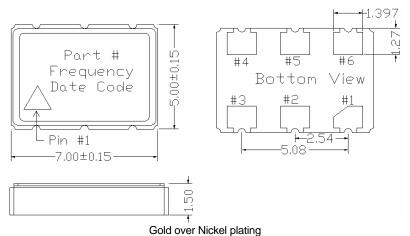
VCC6-QCx and VCC6-QAx Package Drawing
